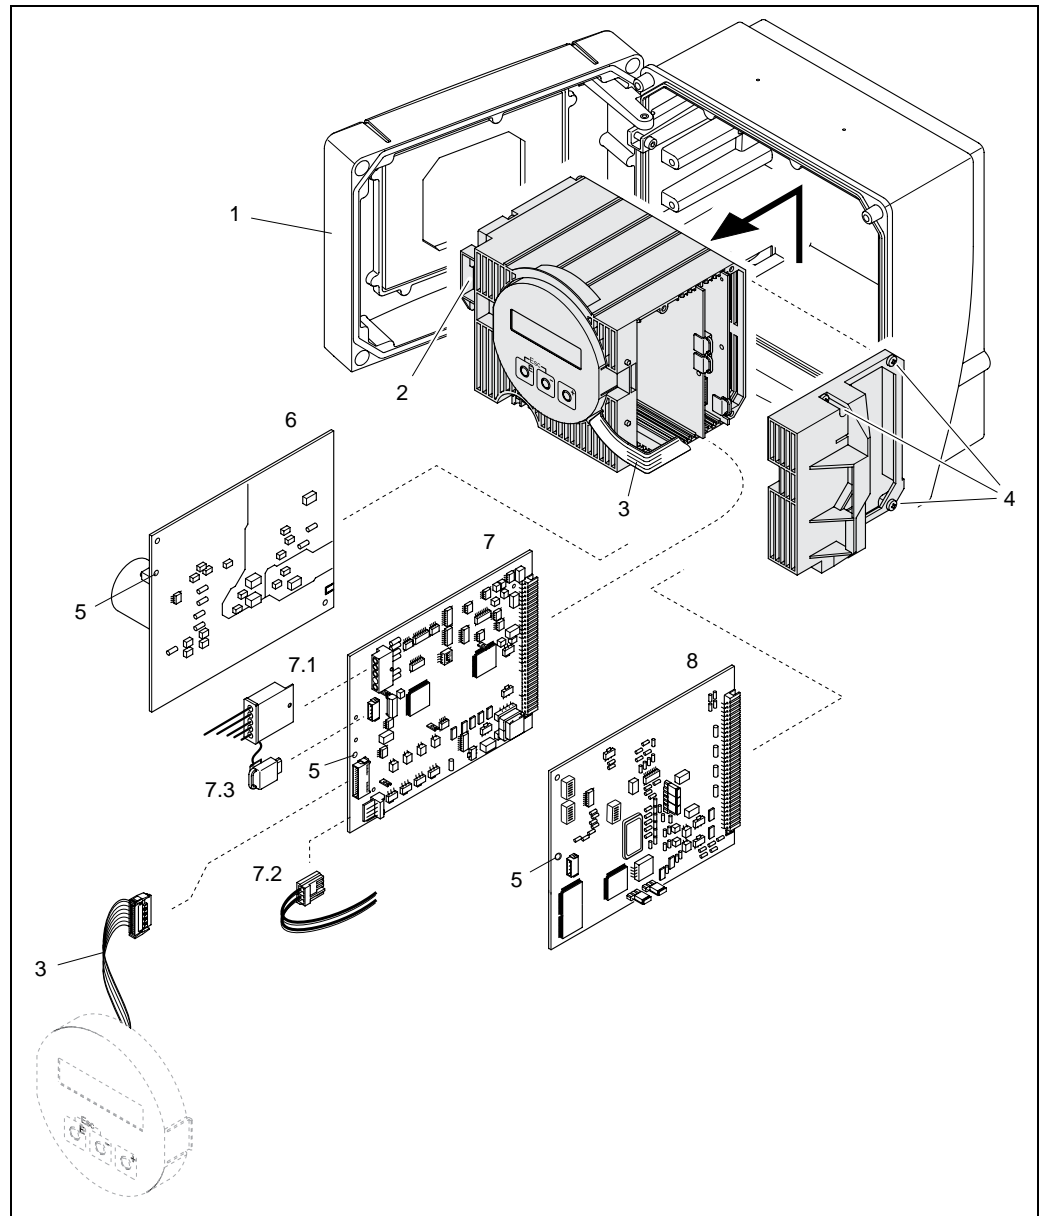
Wall-mount housing: removing and installing printed circuit boards
